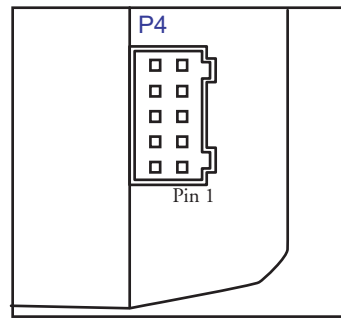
P4 — 10-Pin Locking Wire Crimp
